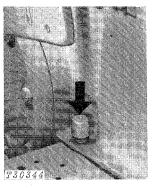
Transmission-Hydraulic System Dipstick Resting On Top Threads
